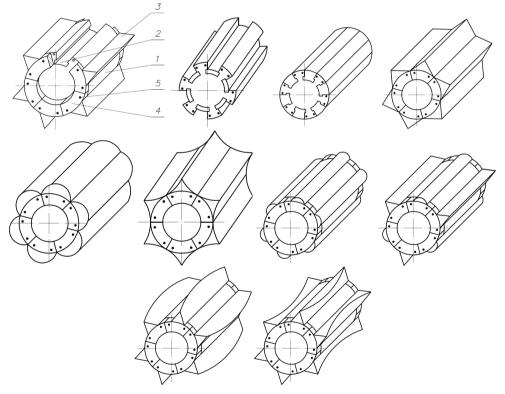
Schemes of rollers of rollers with variable working surfaces: 1 - body; 2 - through slots; 3 - variable inserts; 4 - face fixing strips; 5 - threaded elements.
